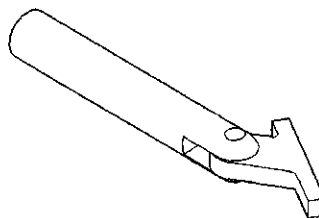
Crankshaft Main Bearing Remover/Installer Tool C3059
